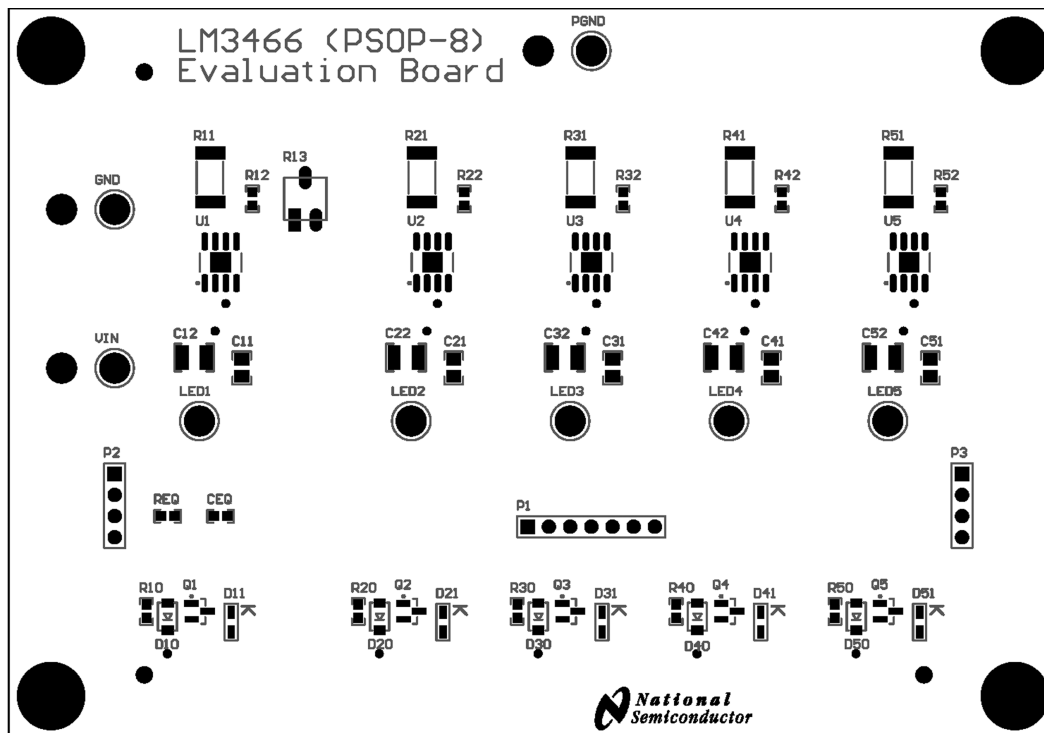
LM3466 Evaluation Board PCB Top Overlay
